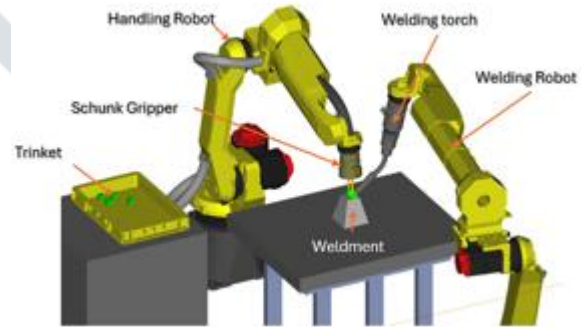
Full view of welding cell reproduced in Robot Guide 3D Environment
